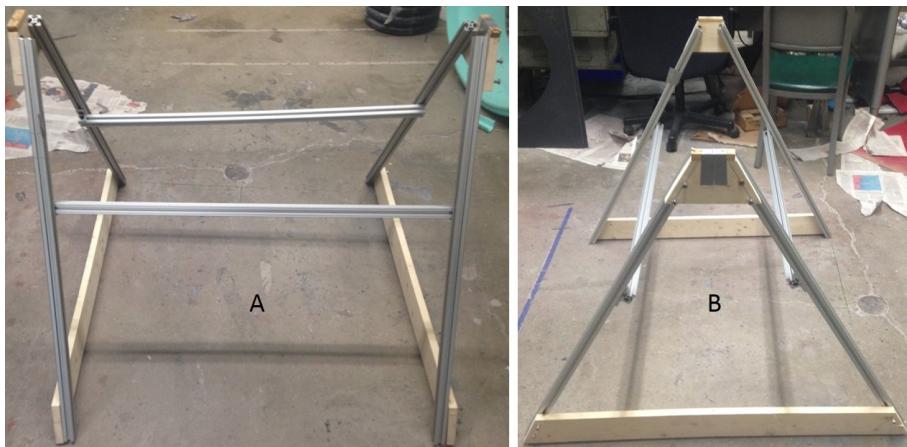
Front view (A) and side view (B) of the frame used to stabilize the v-section while it was being welded in place.
